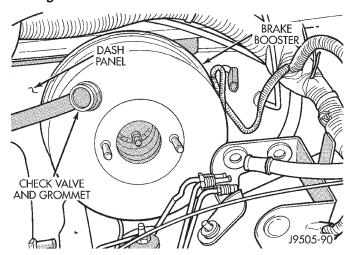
Brake Booster Positioned On Dash Panel POWER BRAKE BOOSTER INSTALLATION (XJ WITH ABS)
